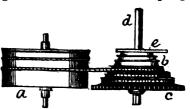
Mainspring barrel and fusee. a, mainspring barrel; b, fusee; c, great wheel d, winding square; c, snall-shaped flange.
